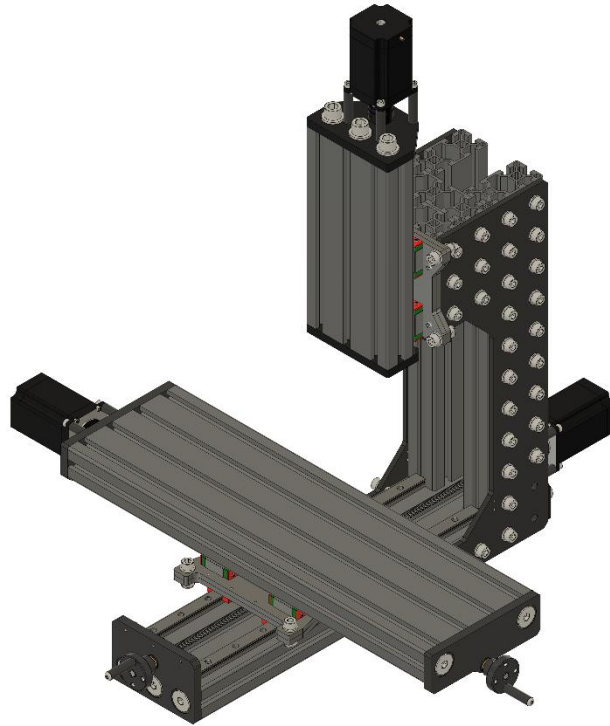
Mill assembly, combining the X Y and Z axes assemblies.
